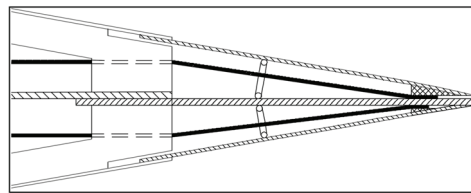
Actuator layout for the wing trailing edge morphing. [91]
